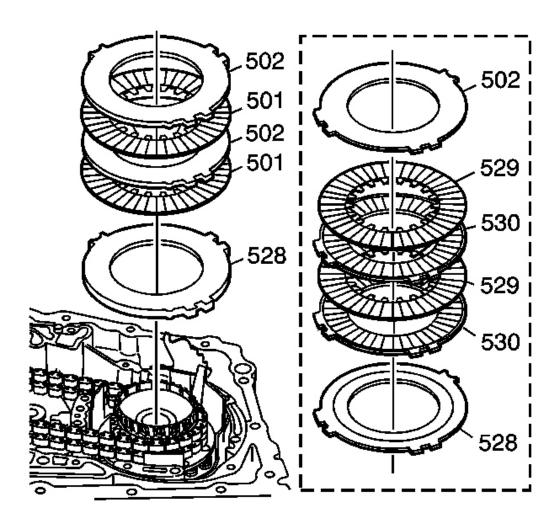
Identifying Fourth Clutch Components Courtesy of GENERAL MOTORS CORP.
